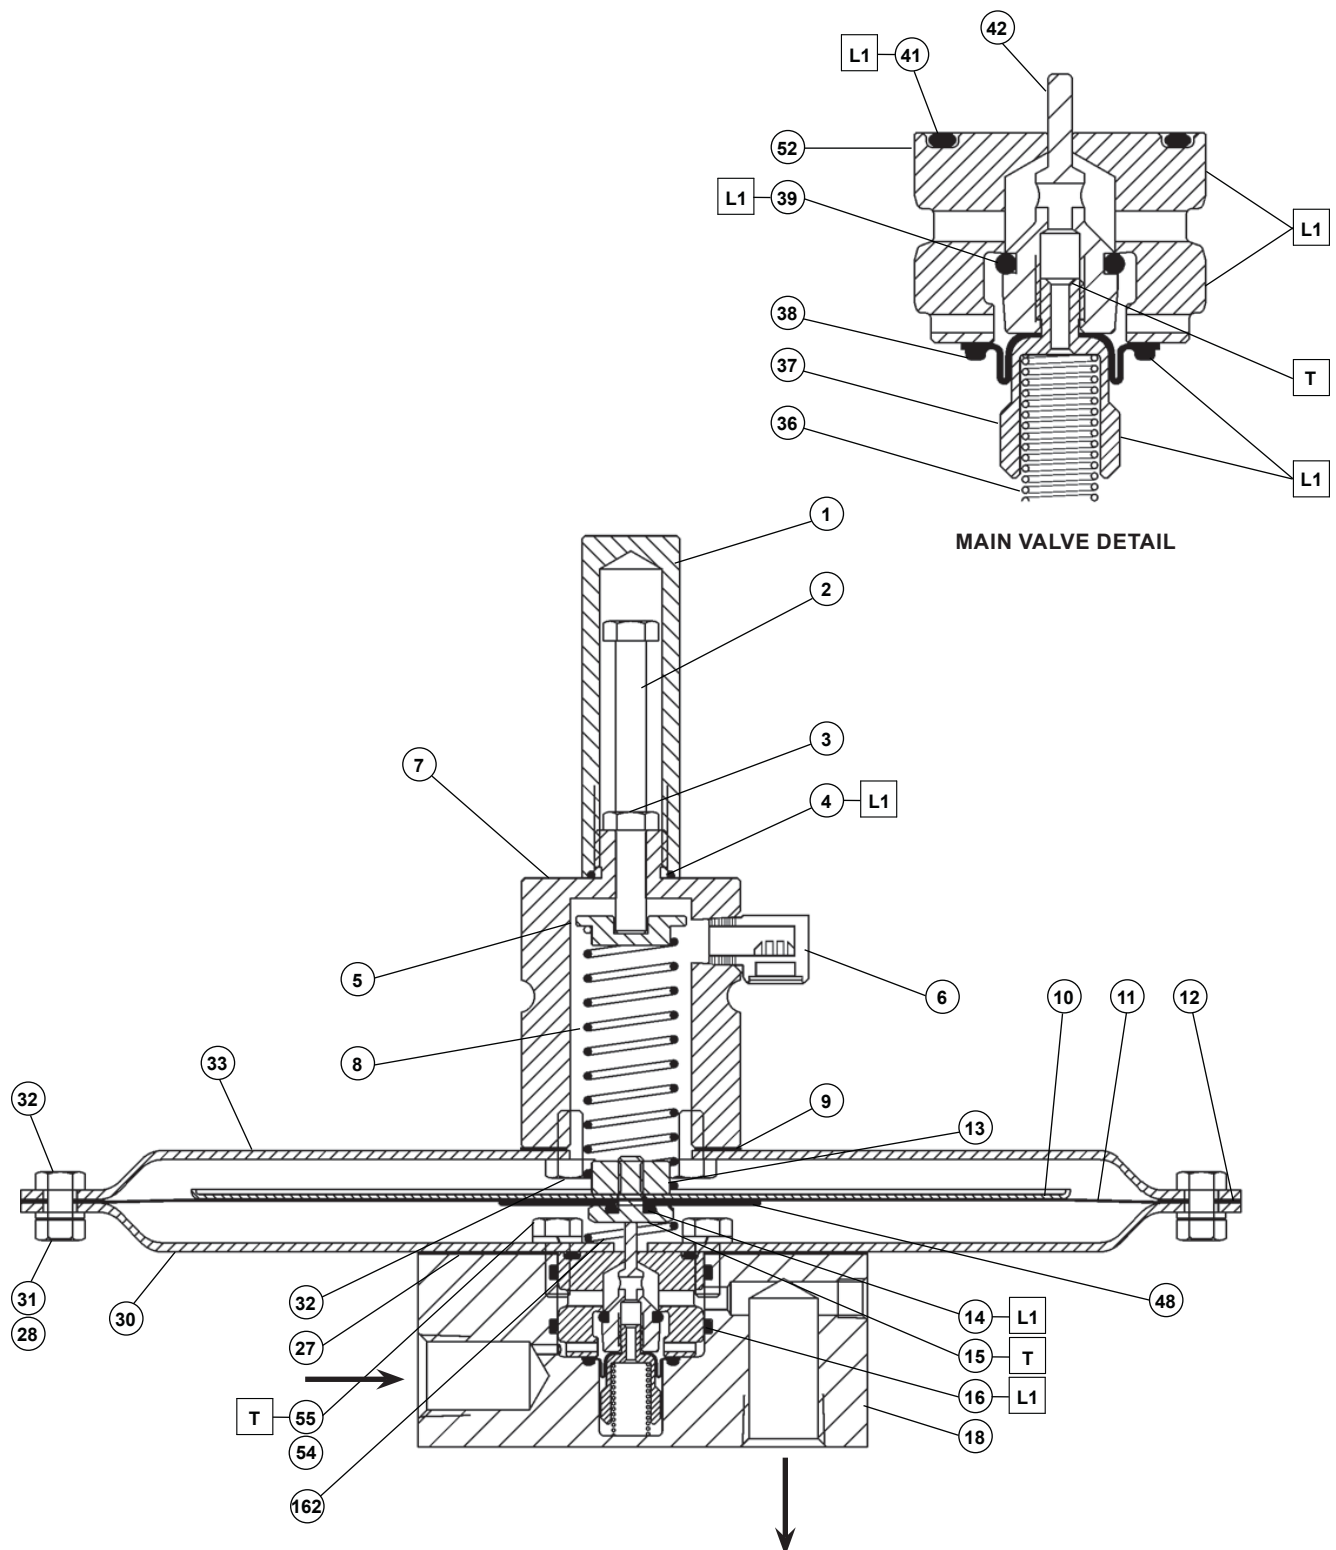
Type ACE95jr Tank Blanketing Valve Assembly
